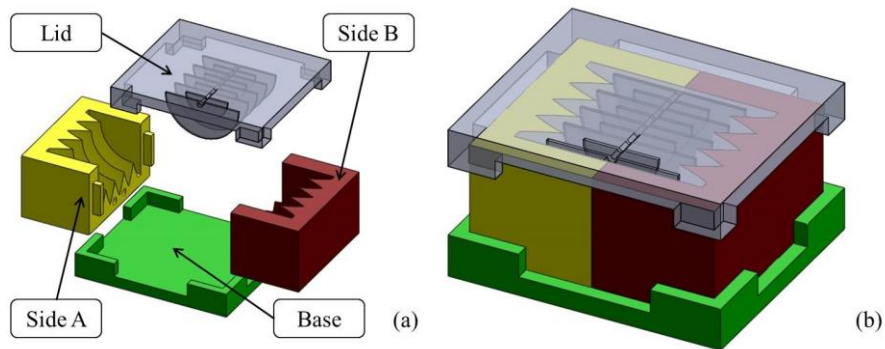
3D Mold V1 for First Version of Extension Mechanism, (a) Exploded View; (b) Assembly View
